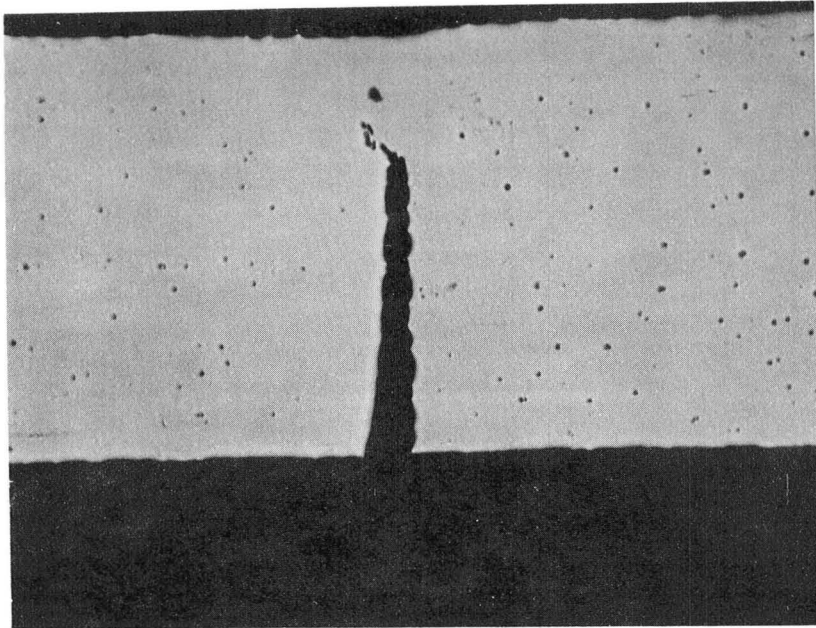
Photomicrograph of a Cross Section of a Sensor Installed in a Test Plate by Laser Welding with an Enlargement of the Weld Area to Show Depth of Weld Penetration
